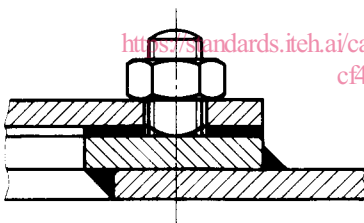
Threaded stud welded to the hand-hole liner (types B and C)
